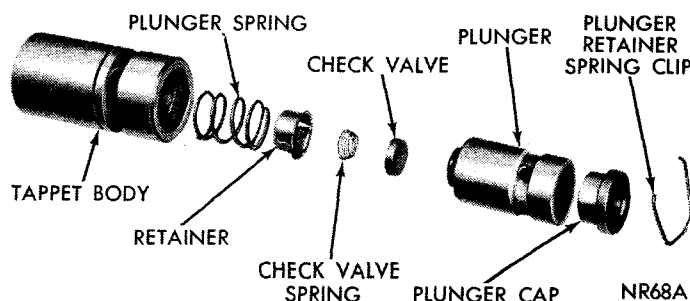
Hydraulic Tappet Assembly (Disassembled View)
